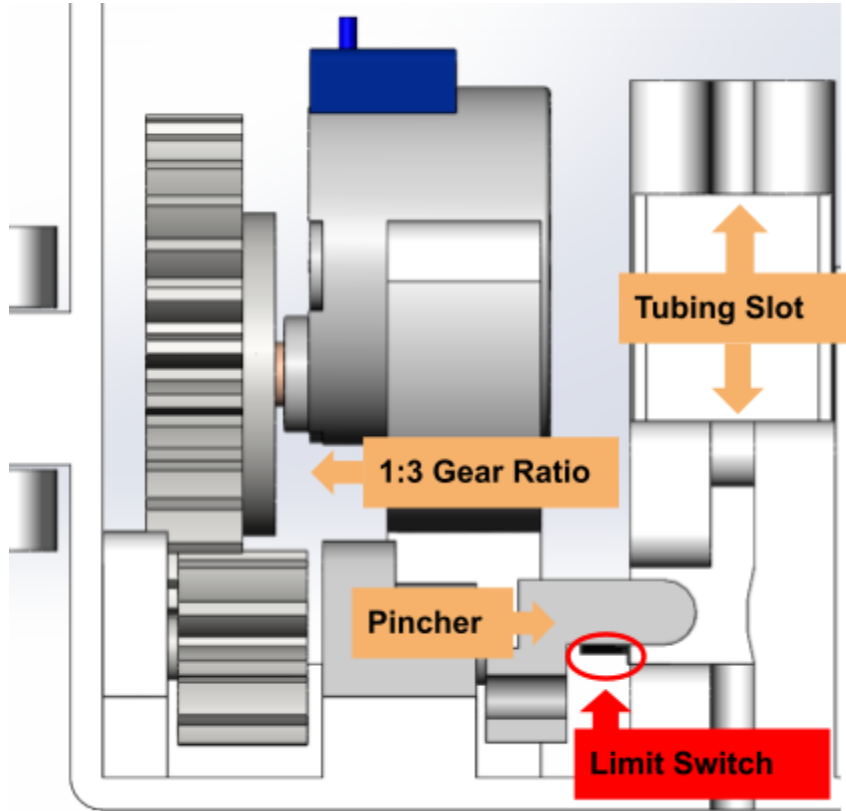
A front view and schematic of a SolidWorks assembly of iteration 2 consisting a 1:3 gear ratio (3 = driver gear and 1 = driven gear)
